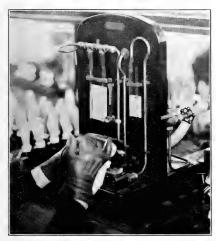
FLUTTER VALVE LEAKAGE-TESTING APPARATUS.
